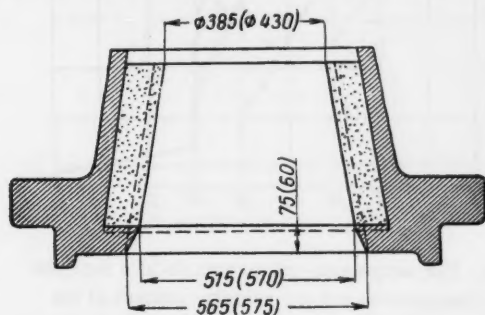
Sketch of the new-type hot top (the dimensions of the old hot top are shown in brackets).
